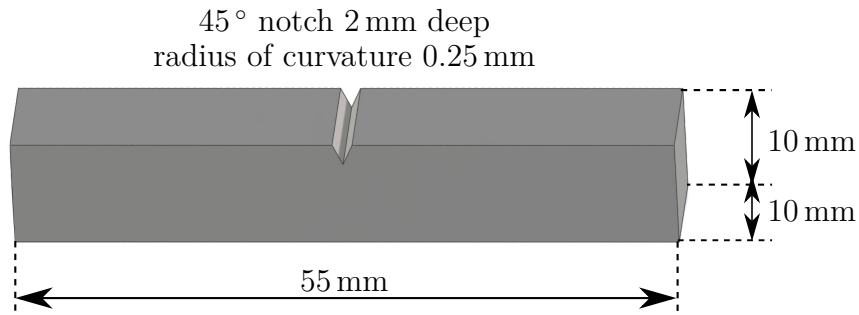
Sample geometry for Charpy impact testing performed on as-transformed and tempered conditions.
